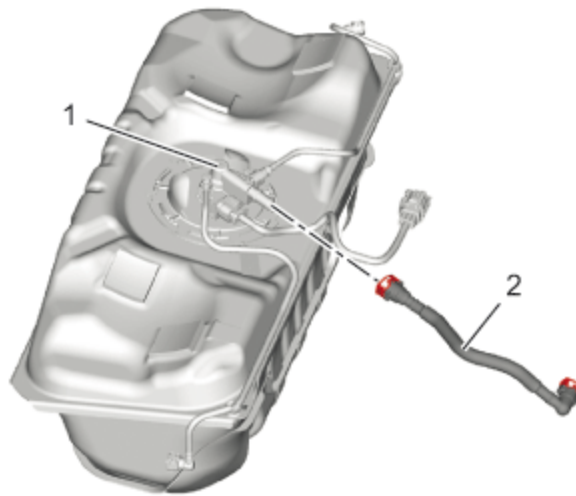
Evaporative Emission Rear Hose And Fuel Tank Fuel Pump Module
